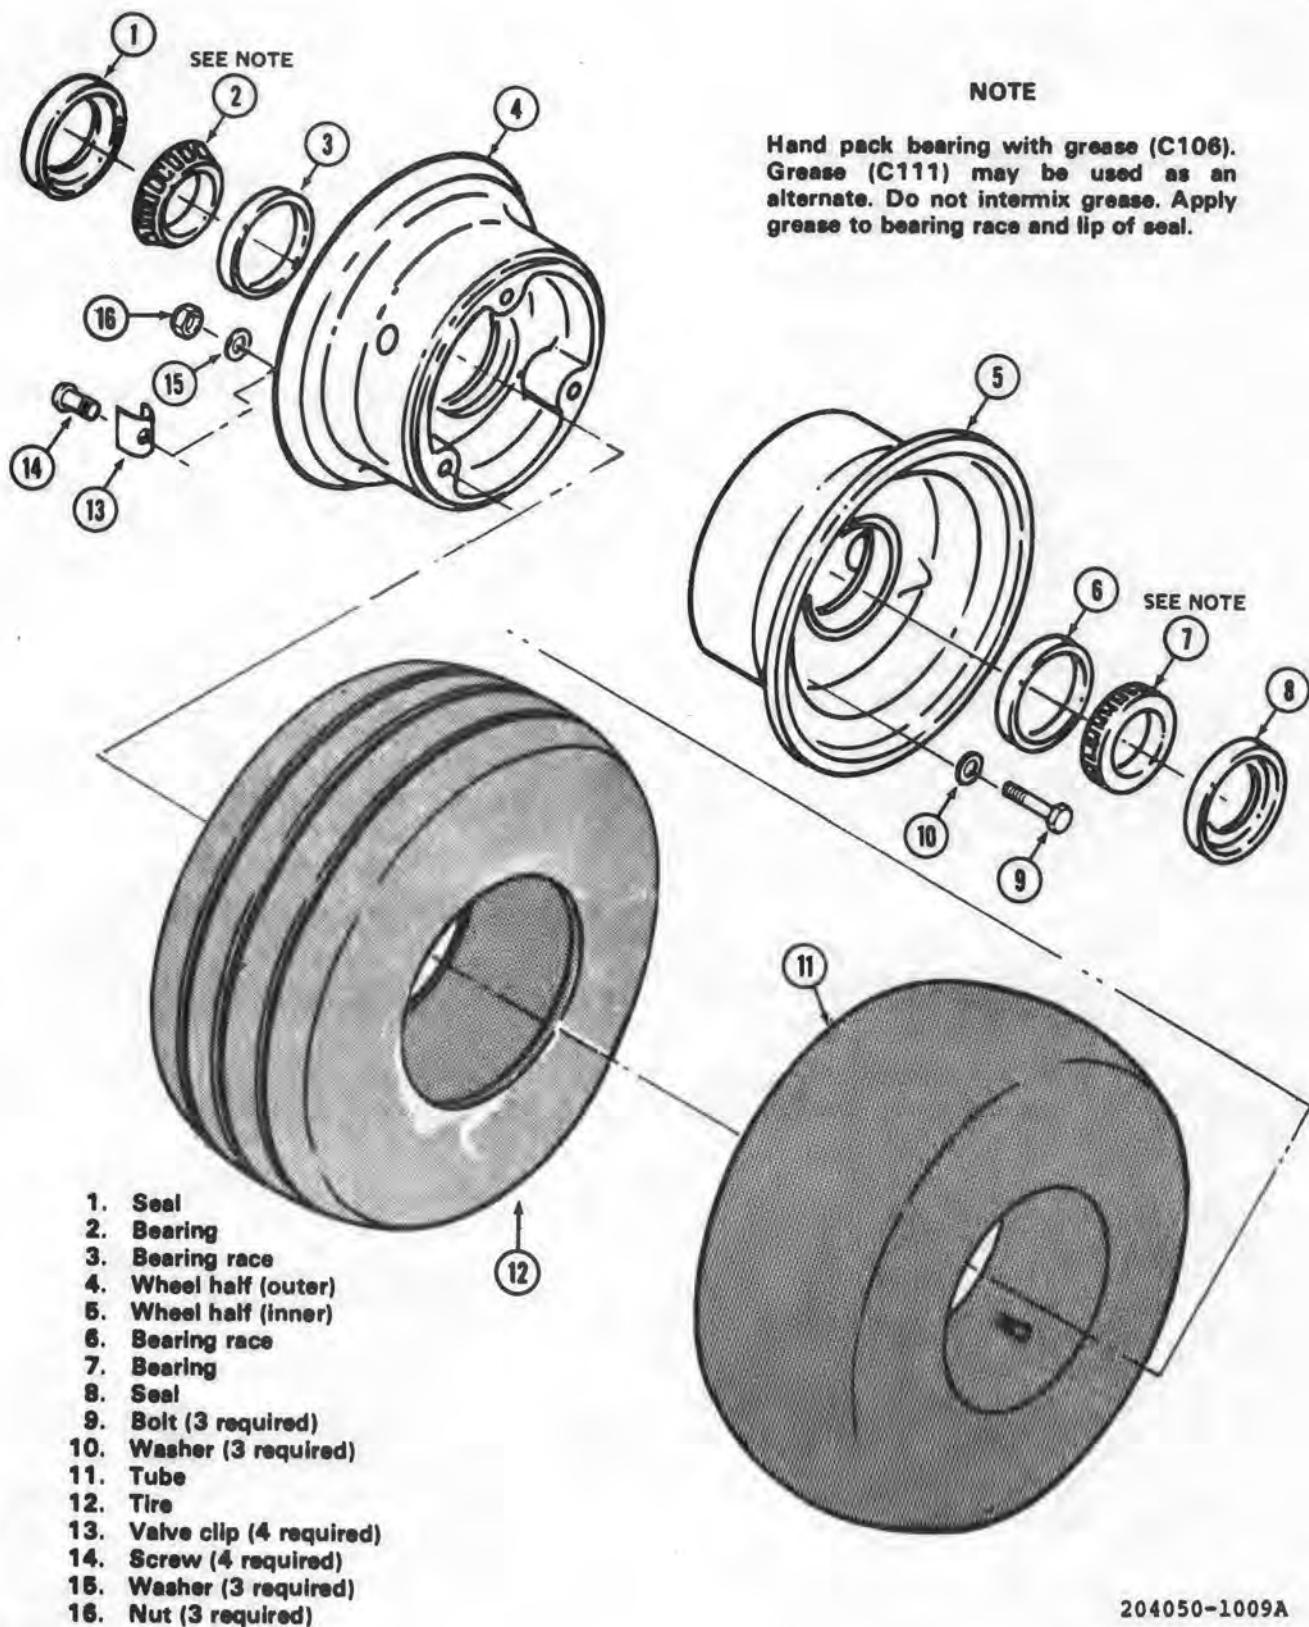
Wheel assembly, ground handling gear — disassembly
